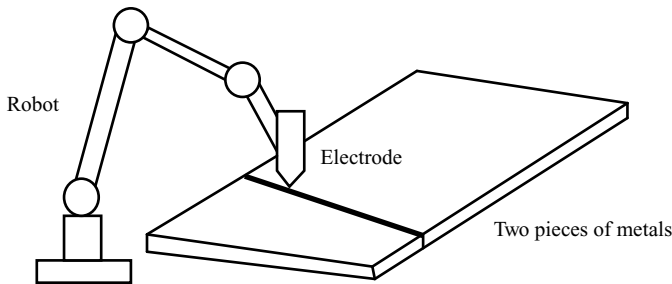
Two-dimensional Robot Arc Welding
